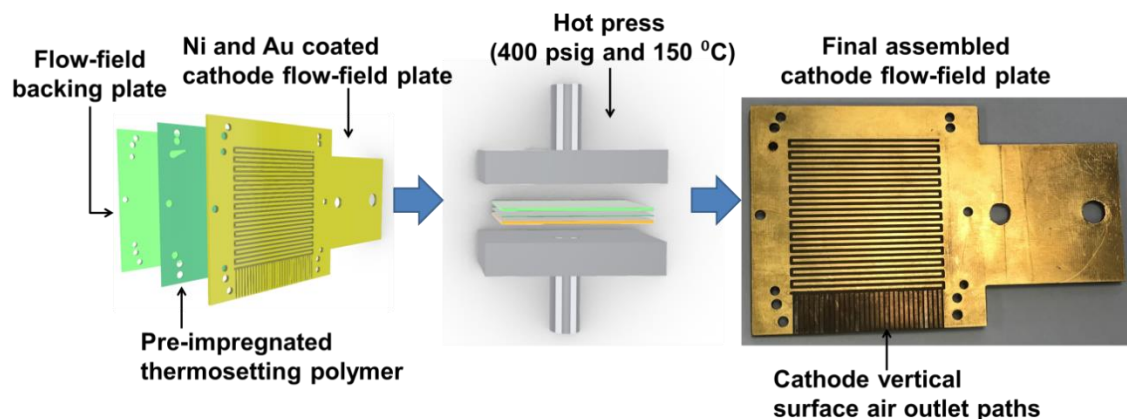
Schematic outline of layer-wise PCB based PEMFC flow-field assembly. The example presented here is of a 25 cm² cathode single-serpentine flow-field.
